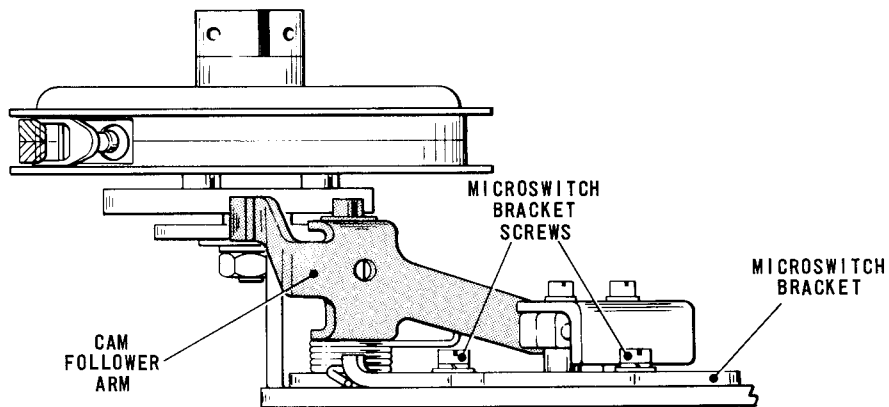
END-OF-LINE INDICATOR TRIP MECHANISM
